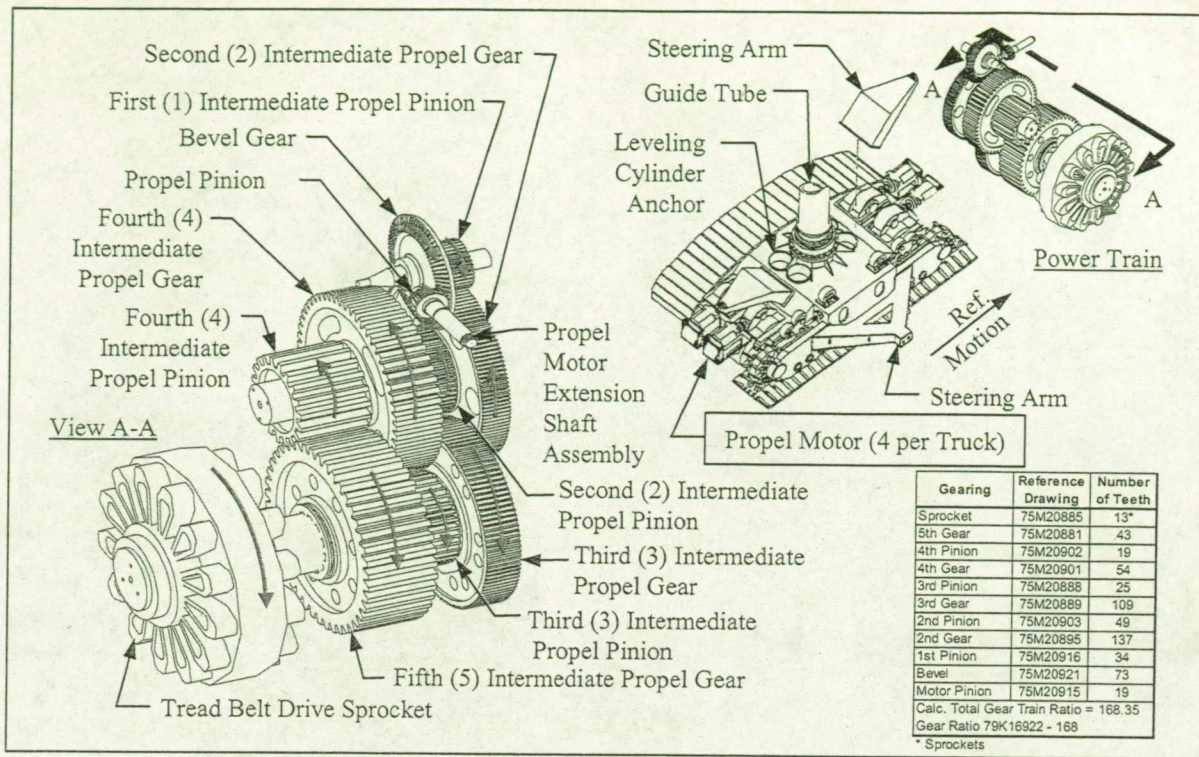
Crawler Transporter (CT) Drive (Propel) System Gearing and Tread Belt Drive Sprocket
